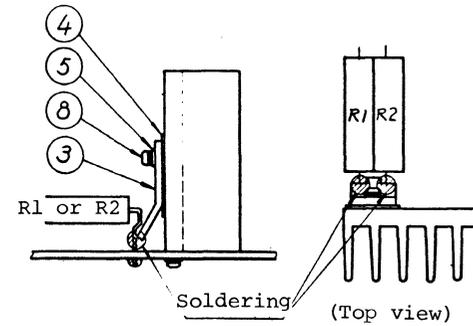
HLPS-2 Circuit Board Assembly (LY-43361-2) (for USA)
